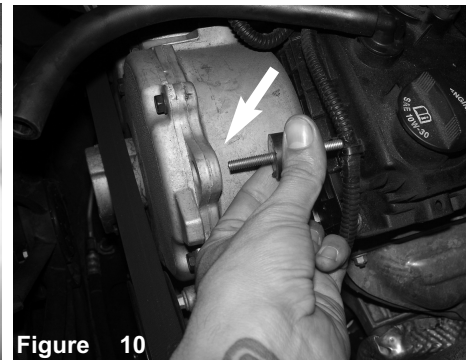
Install the longer side of the vibra mount to the engine valve cover.
